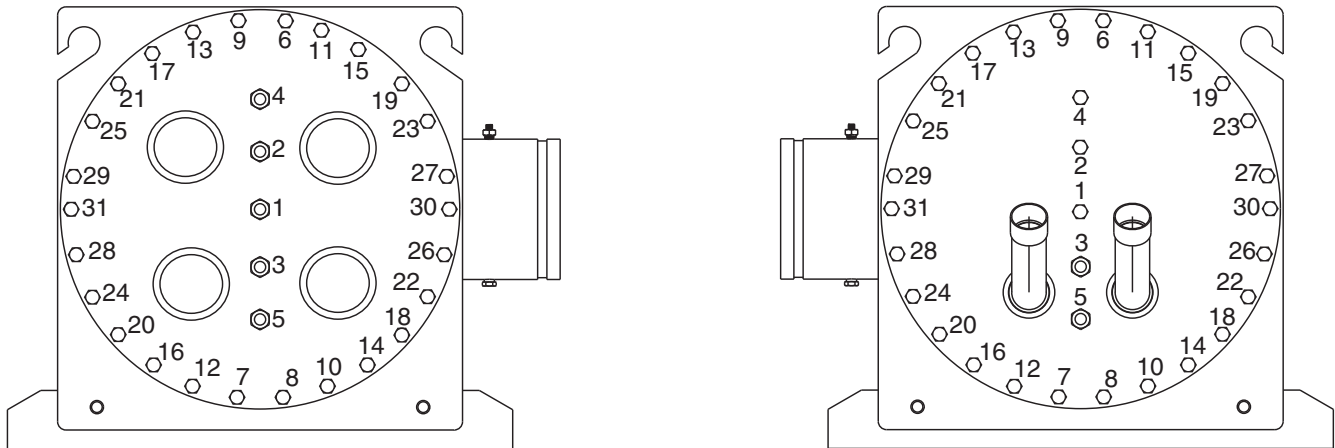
Bolt Tightening Sequence, 30XA142,162,182,202
